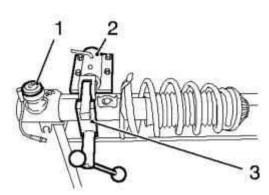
Install special tool on the pipe rack spring: 1 - pressure regulator, 2, 3 - special tool
